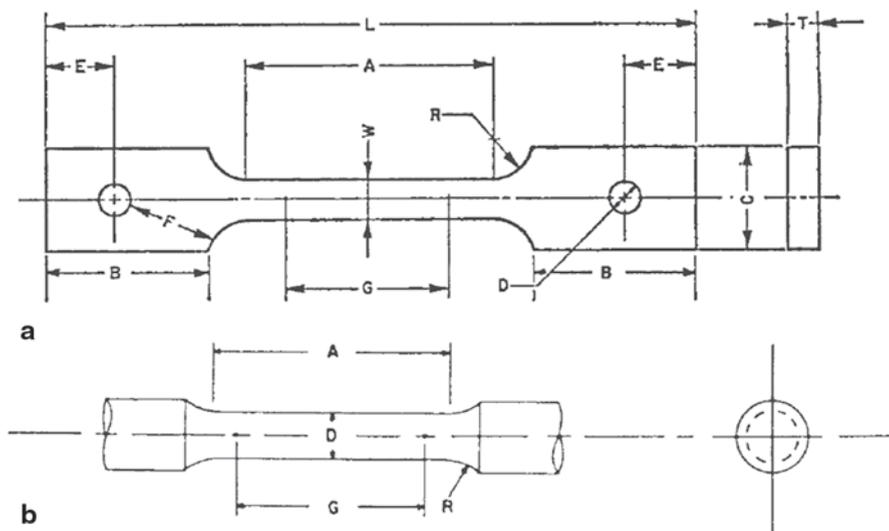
Tensile test specimens specification according to ASTM E8-04. a Flat and b cylindrical specimens
